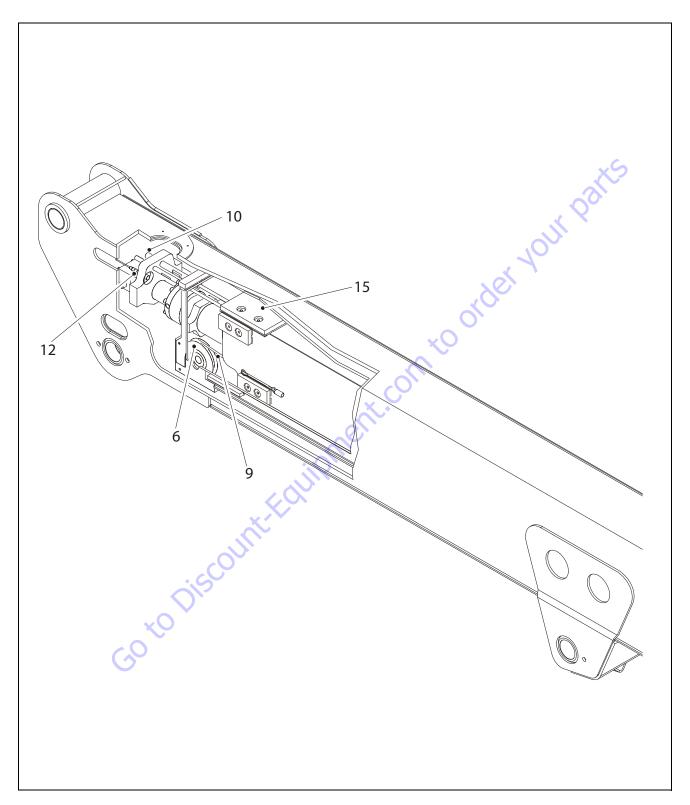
Boom Assembly Cutaway - Sheet 1 of 2
